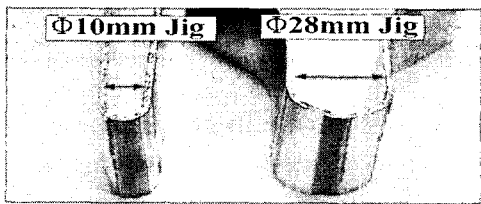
Appearance after the guided bending test for Butt-jointed specimen
